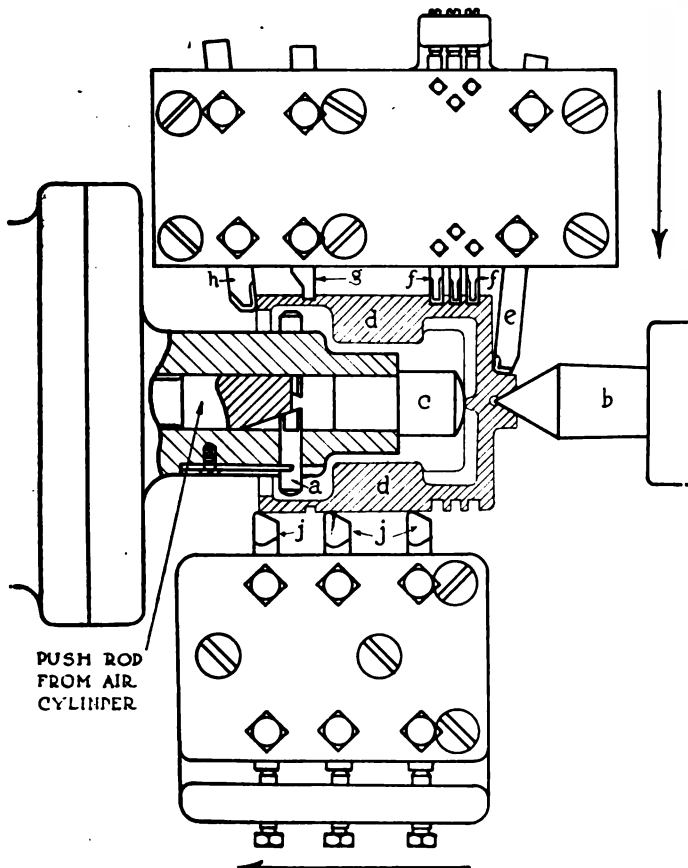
Piston mounted on expanding and centering mandrel of Fay lathe
